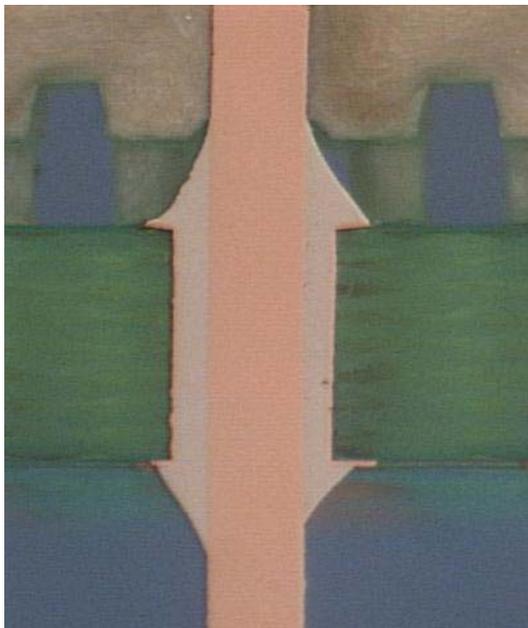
The solder preform + solder paste solution delivered excellent through-hole solder joints.
